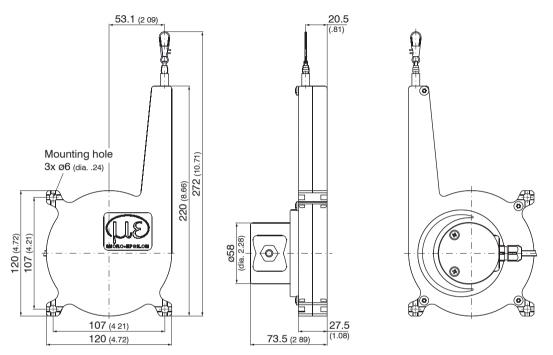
Dimensional drawing WPS-...-MK120-CR, measuring ranges 7500 mm, dimensions in mm (inches), not to scale
